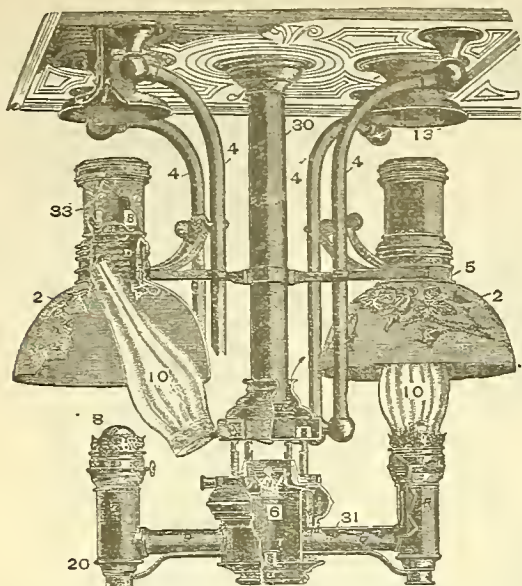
Sectional View of Improved Hurricane Chandelier, One Fount, Dual Burners.
